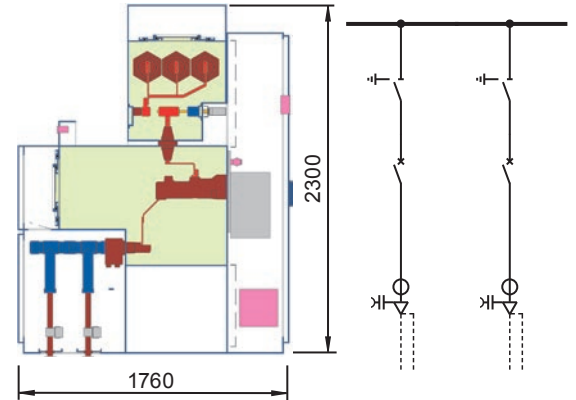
Double feeder panel 24 kV, 630 A with two cables per phase (see also Page 56)
